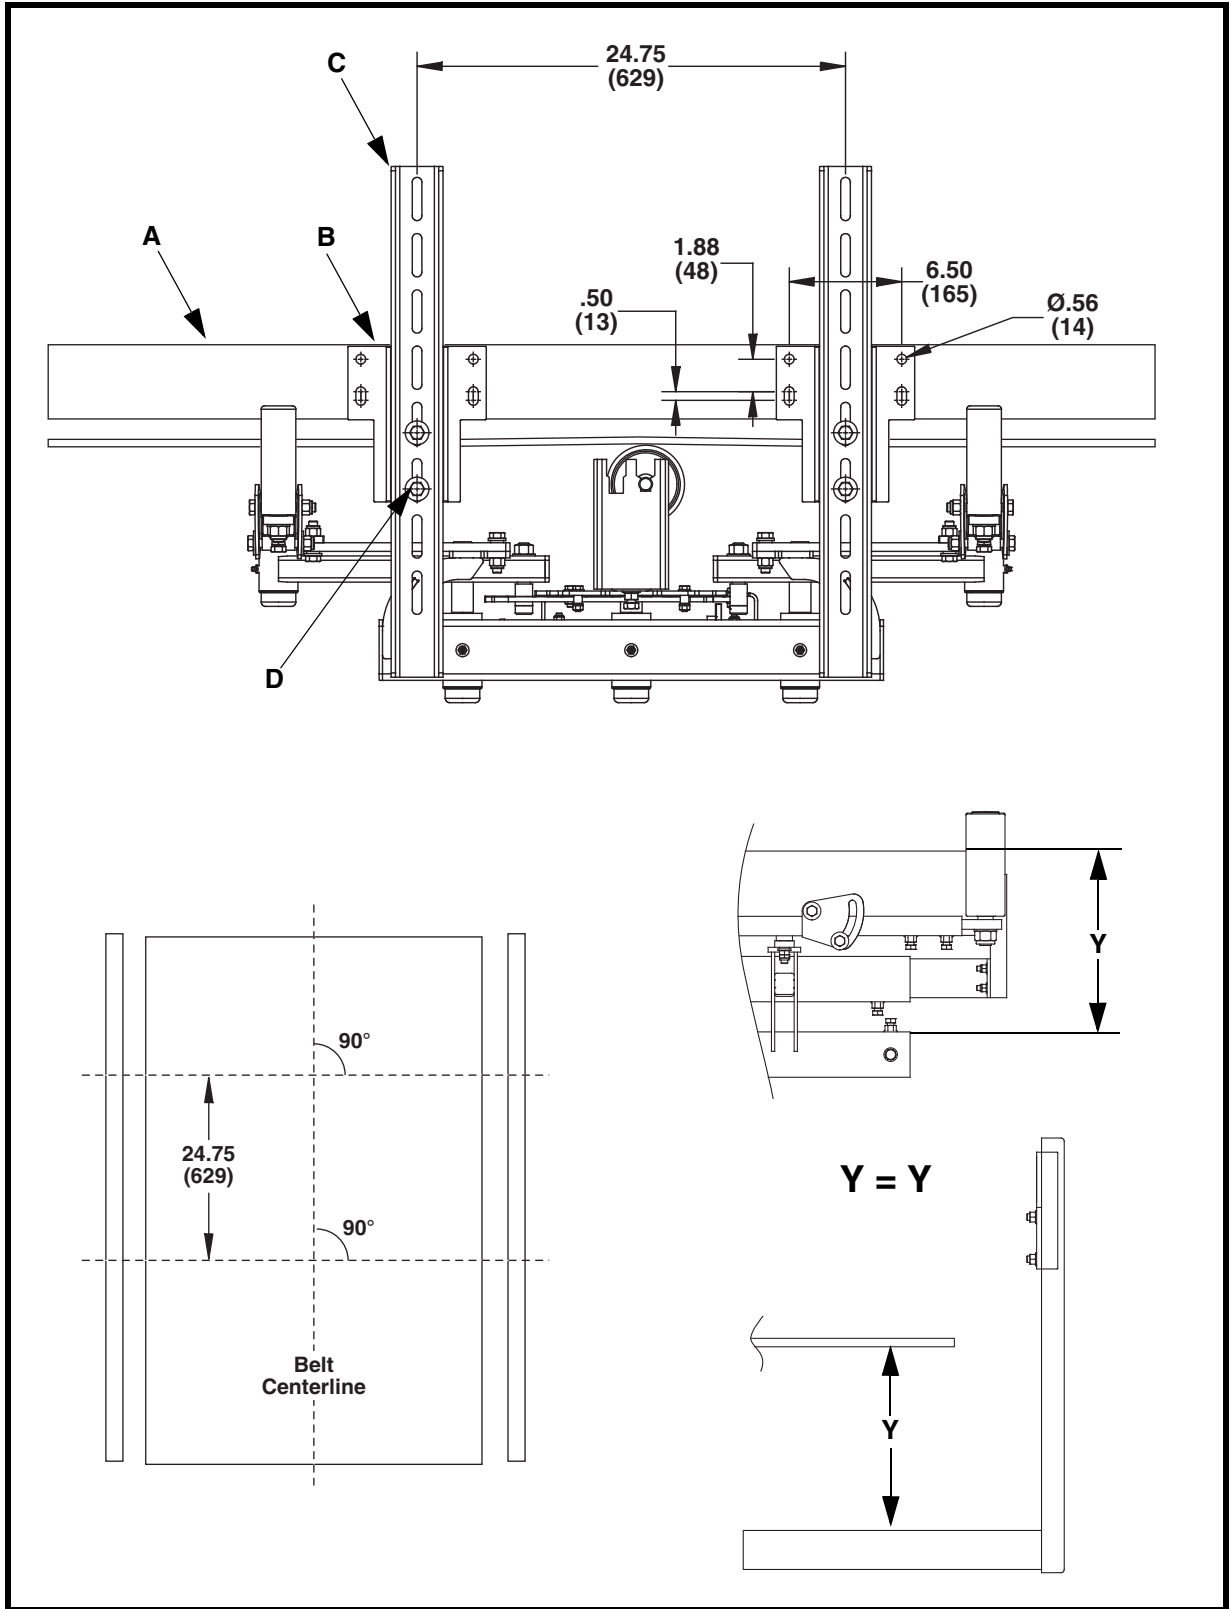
Mounting Dimensions–Martin® Tracker™ Reversing (Lower Unit)
